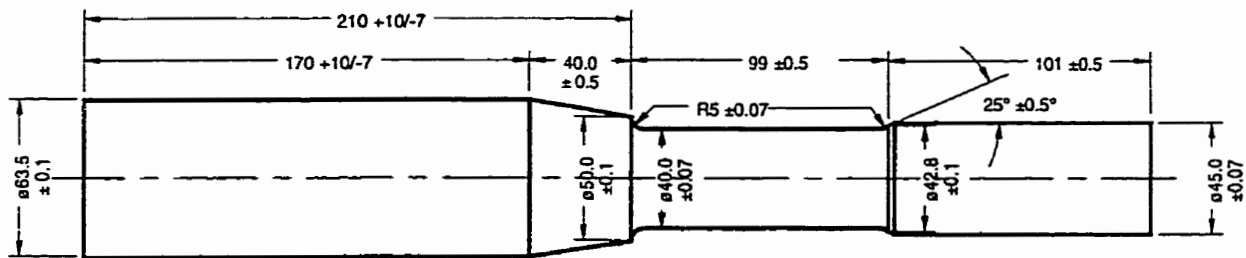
Bending-torsion specimen. All dimensions in mm.
